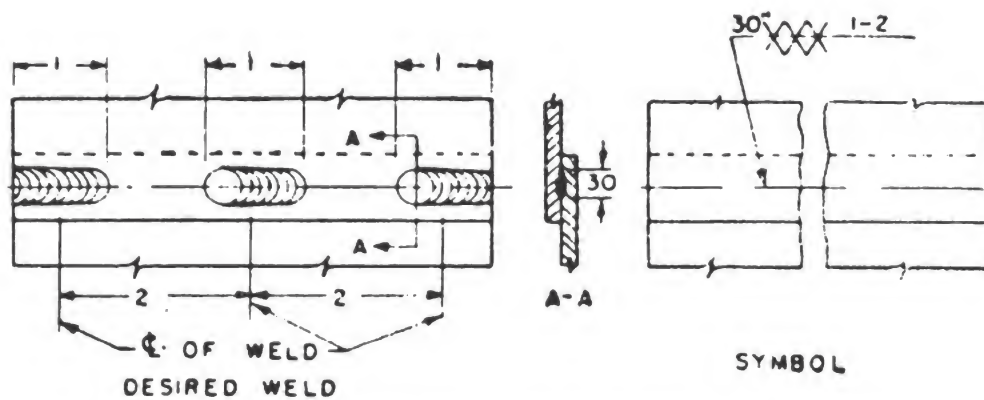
Length and pitch of intermittent seam welds.
